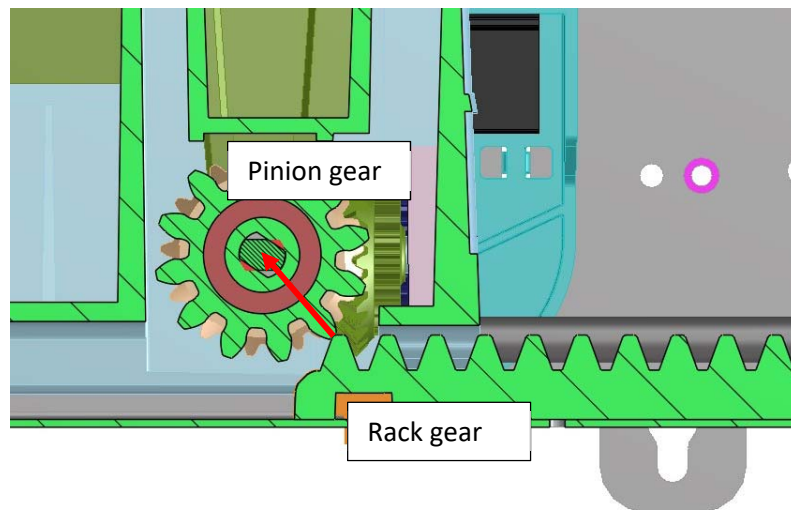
Printhead cleaner with pinion gear locking up with rack
